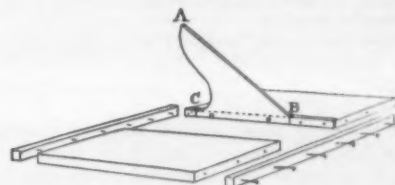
CONSTRUCTION OF A HORIZONTAL DIAL.
